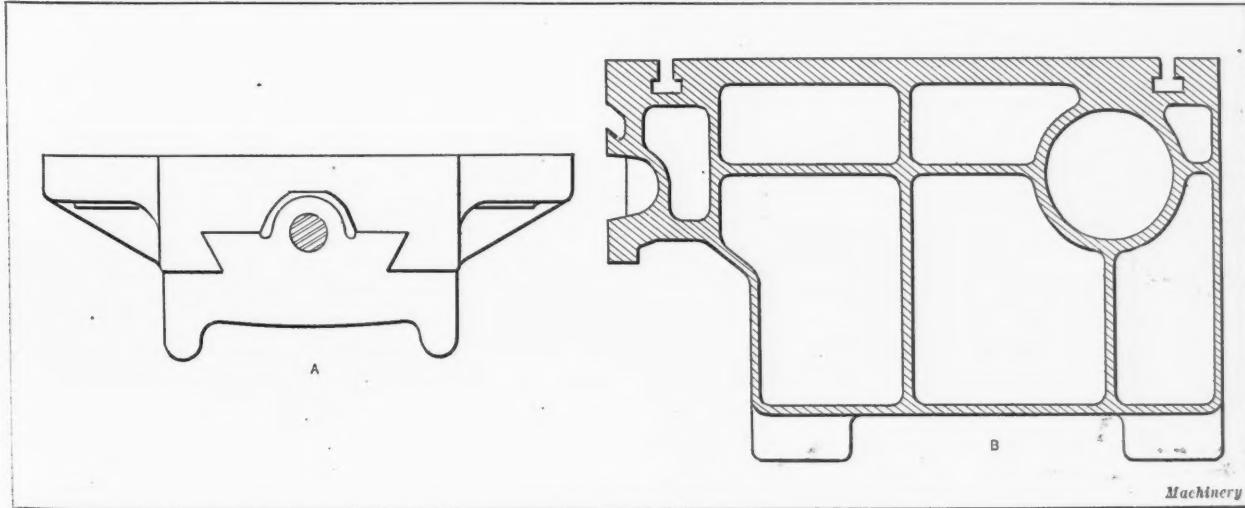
Diagrams showing the Inverted Dovetail Construction of the Slides and the Barrel Construction of the Column
